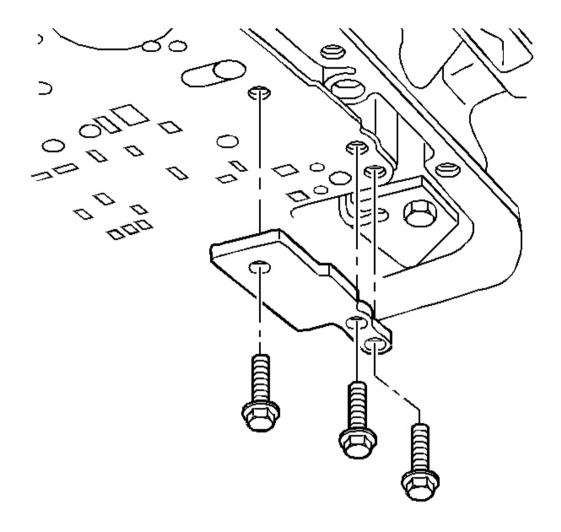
Identifying Spacer Plate Support Bolts Courtesy of GENERAL MOTORS CORP.
